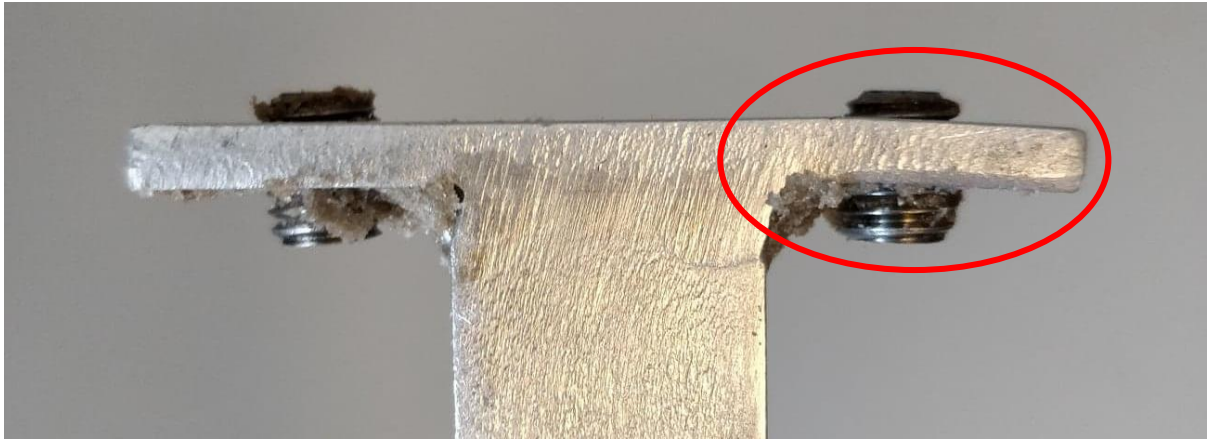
The end of the pipe, which is supposed to prevent rotation, was damaged after the test. This shows the construction worked as intended until failure.
